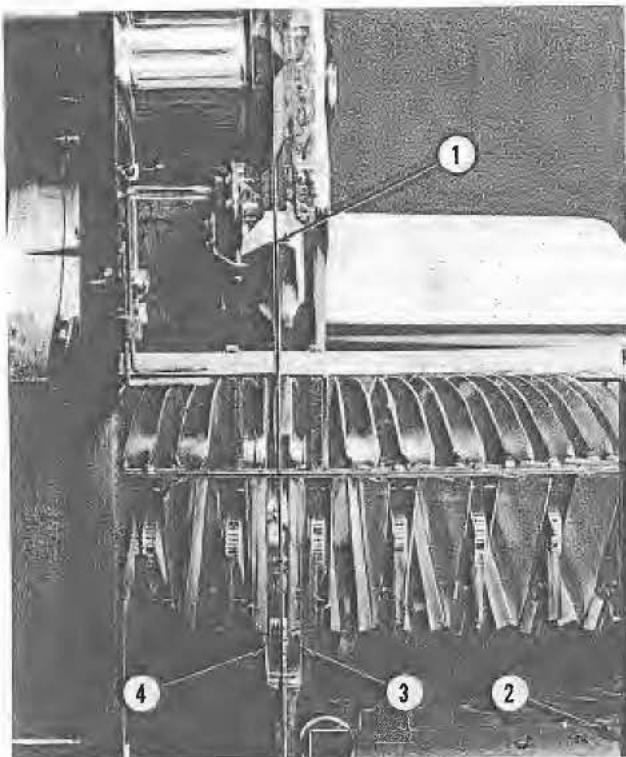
CENTER LINE FOR BACK STOP PAWL SETTING
